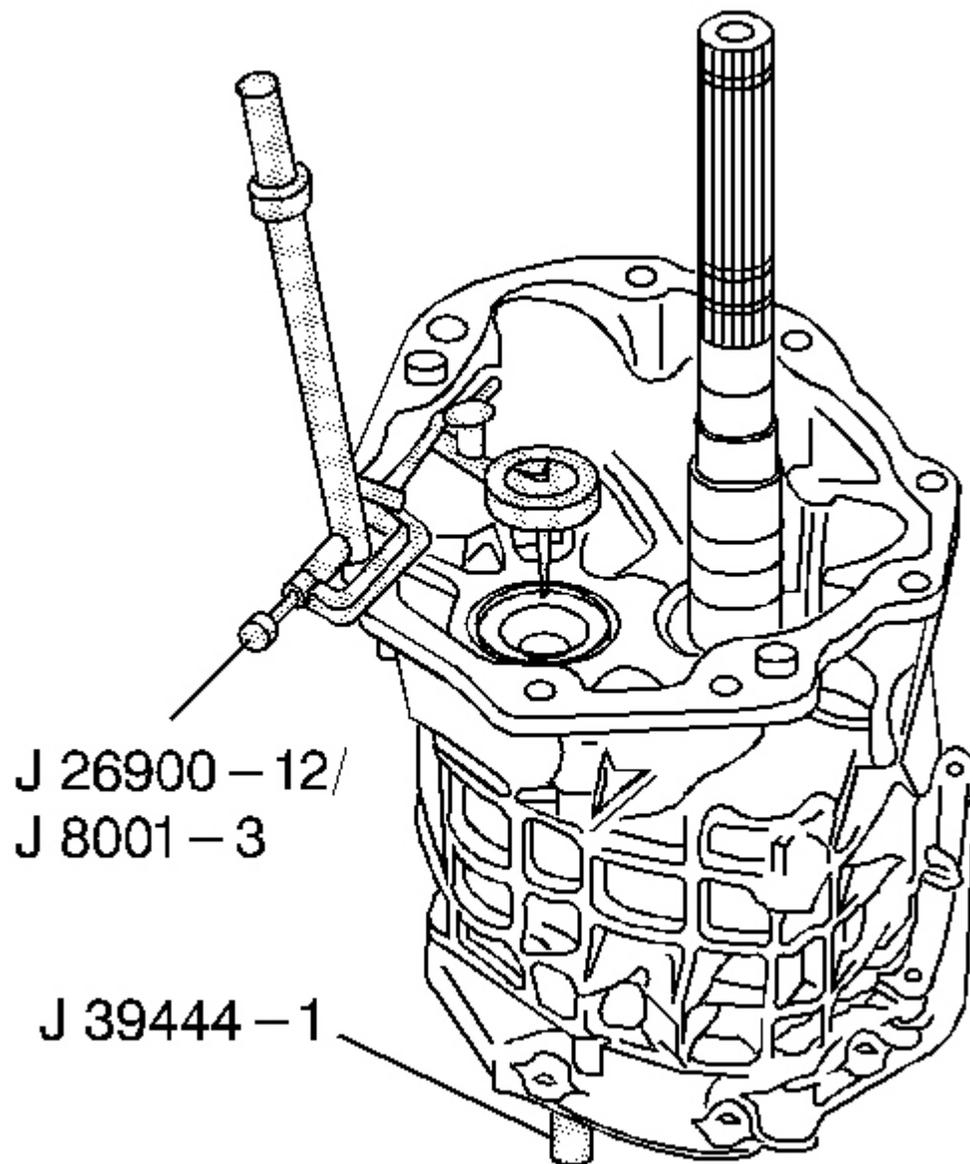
Measuring Countershaft End Play With J 8001 & J 39444-1
